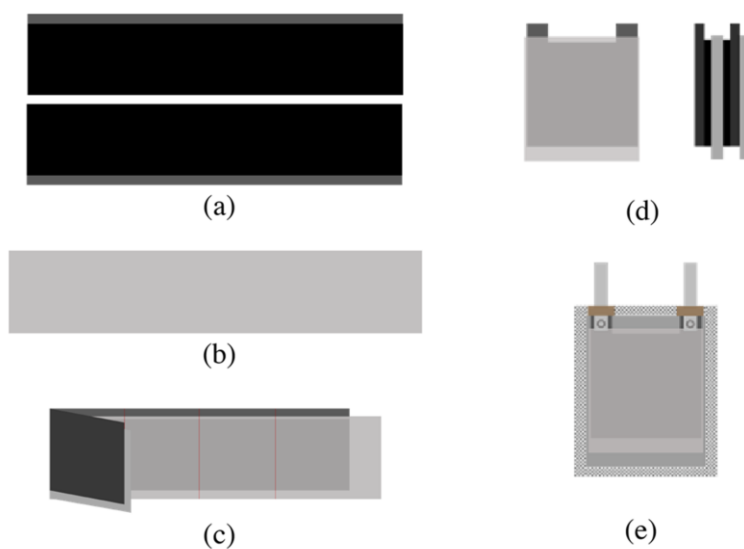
Layout showing components of a pouch cell supercapacitor: (a) carbon-coated electrodes, (b) a separator, (c) a stack of electrodes and separators, (d) front-view (left) and side-view (right) of a rolled cell, and (e) an assembled pouch cell
